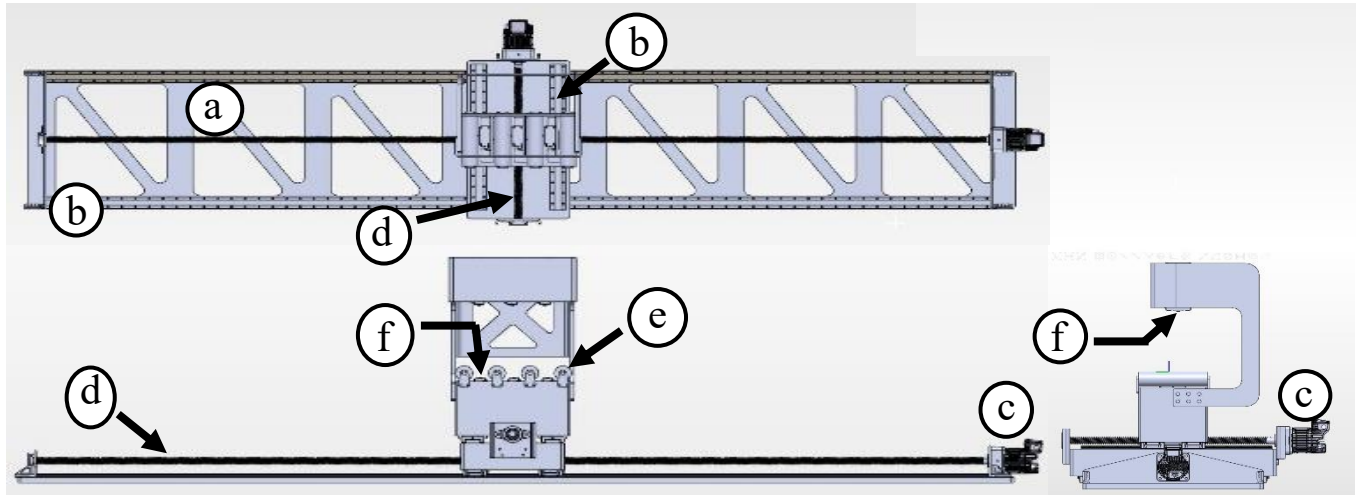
Flexible clamping station: (a) Steel plate; (b) Wide ball bearing carriage and rail; (c) Servomotor CPM-MCVC-D1003P-RLN; (d) Worm gear; (e) Industrial polymer rolls; (f) Pneumatic cylinder SMC HYG50TFR-20
